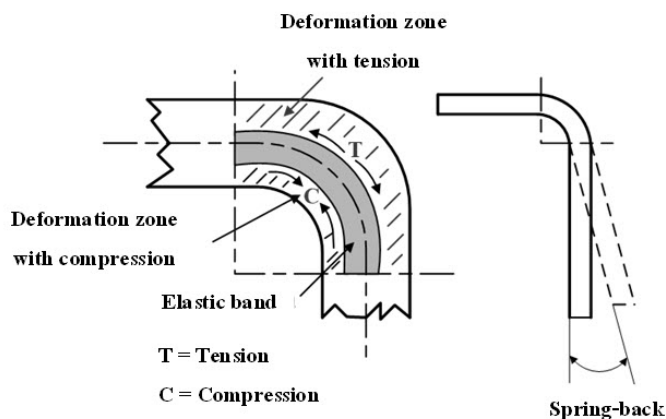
Spring-back mechanism of workpiece after bending (ภาสพิรุฬห์ และคณะ, 2550)
